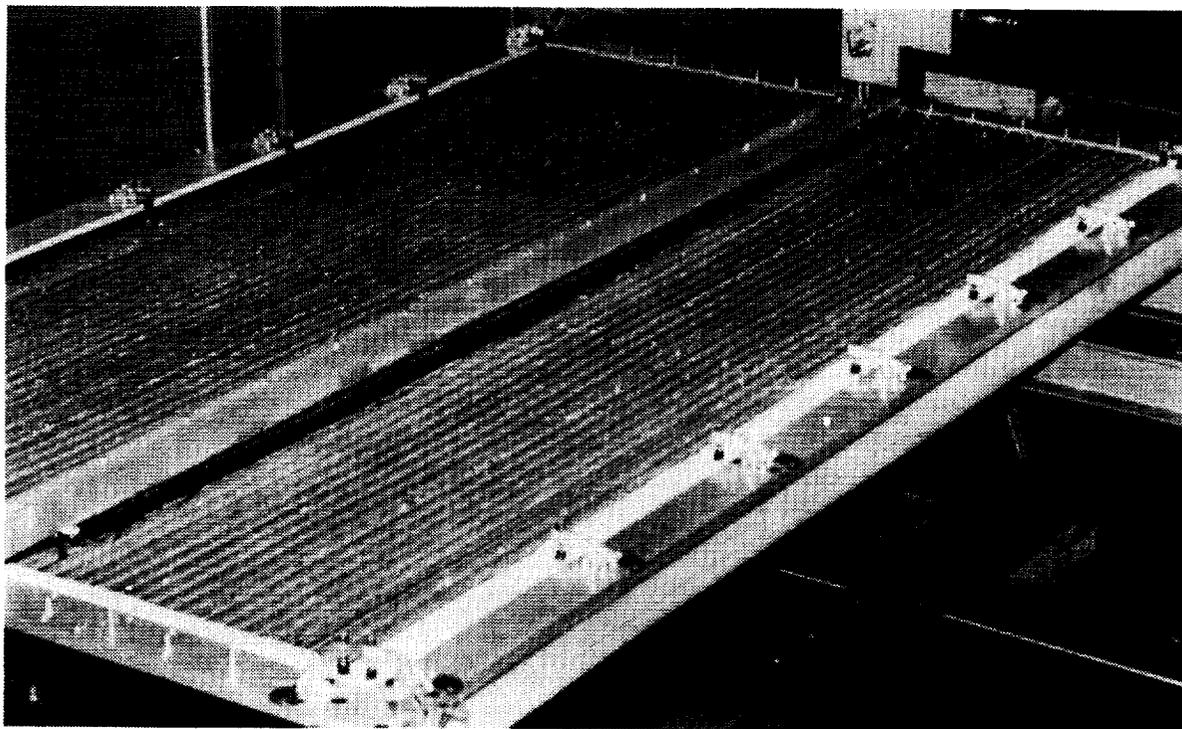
FUSELAGE ASSEMBLY STITCHING ON SINGLE NEEDLE MACHINE
